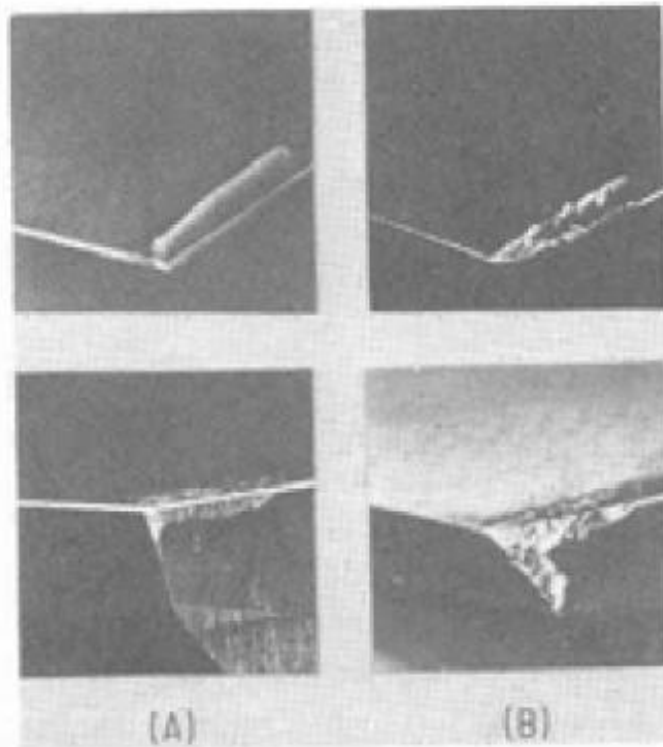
Representative wear patterns on face, flank, and nose of cutting tool, typical of chip-removal process on ductile materials. Crater on face of tool in (A) started well back of cutting edge. In (B) crater wear had progressed to point where weak cutting edge broke down under cutting forces.
